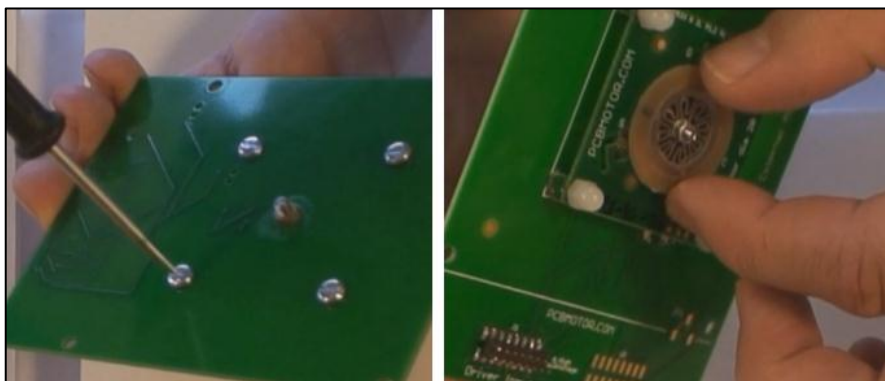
Gently tighten the screws on the bottom of the PCB and then check that the rotor turns
